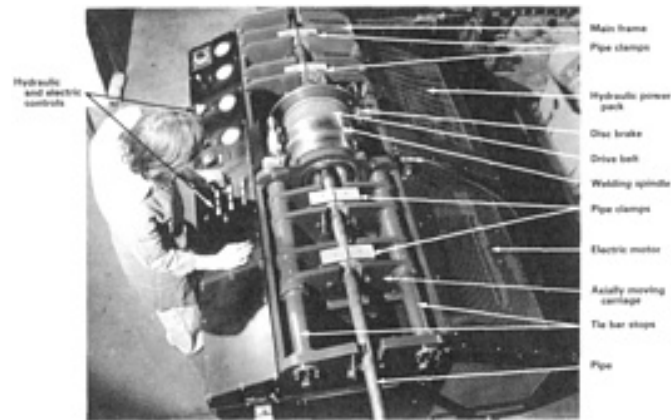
RADIAL FRICTION-WELDING MACHINE WITH A 51 MM (2 IN.) DIAMETER
